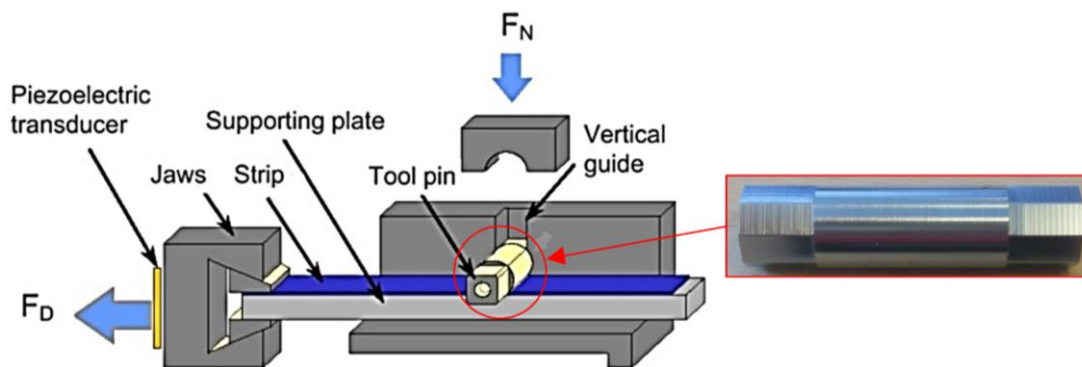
SRT set-up [36] (left), and the circular tool-pin fabricated with octagonal end shape (right).
